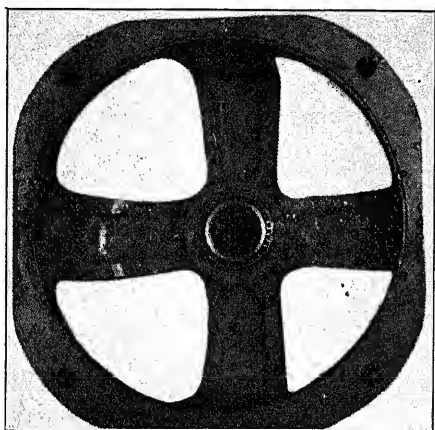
ARRANGEMENT OF LOWER BEARING OF TAPERED ROLLER TYPE FOR INDUCTION VOLTAGE REGULATOR
